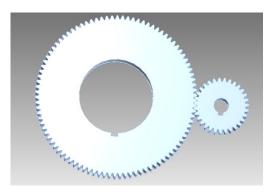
3D models generation with SE Engineering - Gear ZI/Z2.
